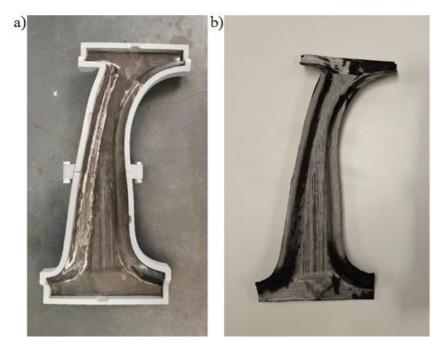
B-pillar (TR300 resin):(a) Component inside the mold, (b) Component after demolding.
